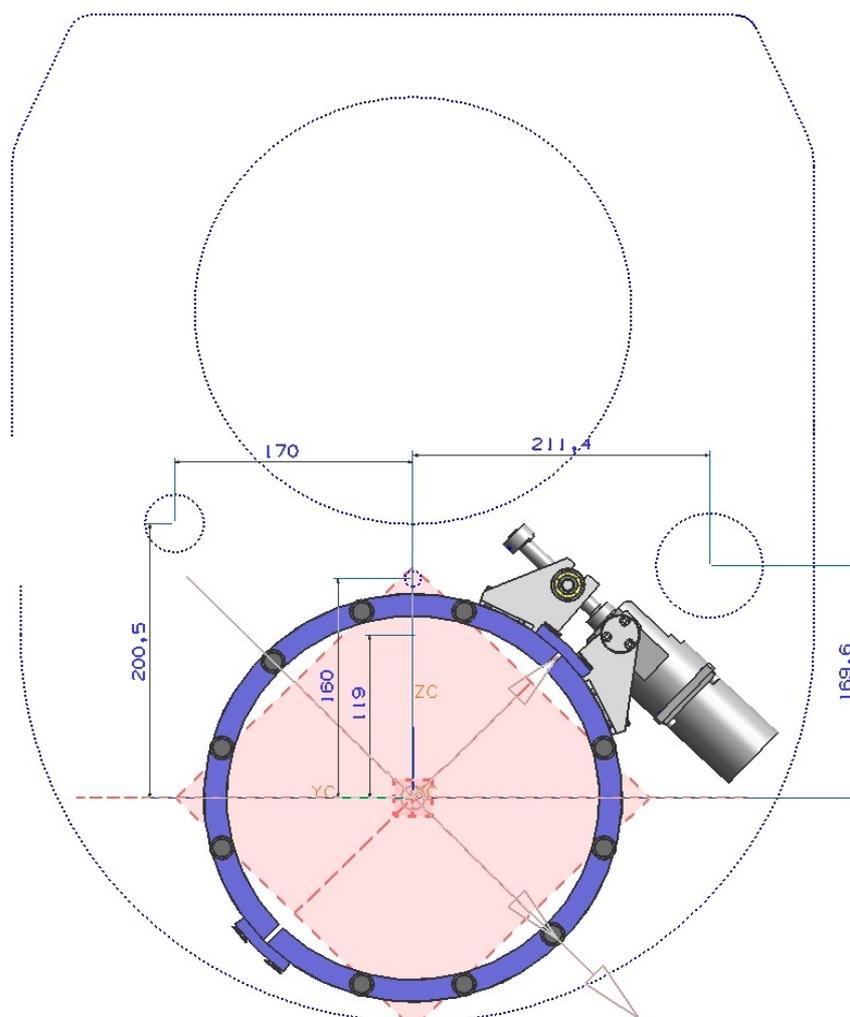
positioning of the blade tuner with respect to the cryomodule geometry
